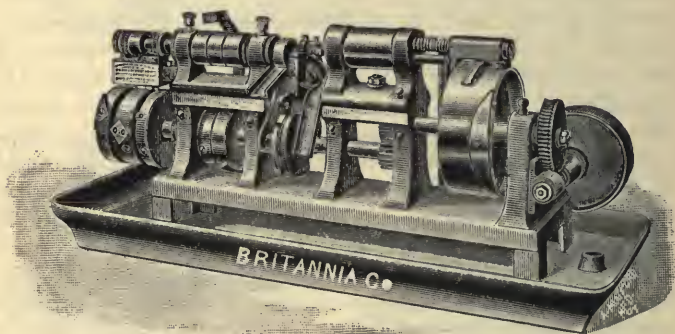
AUTOMATIC WATCH-SCREW MACHINE.
